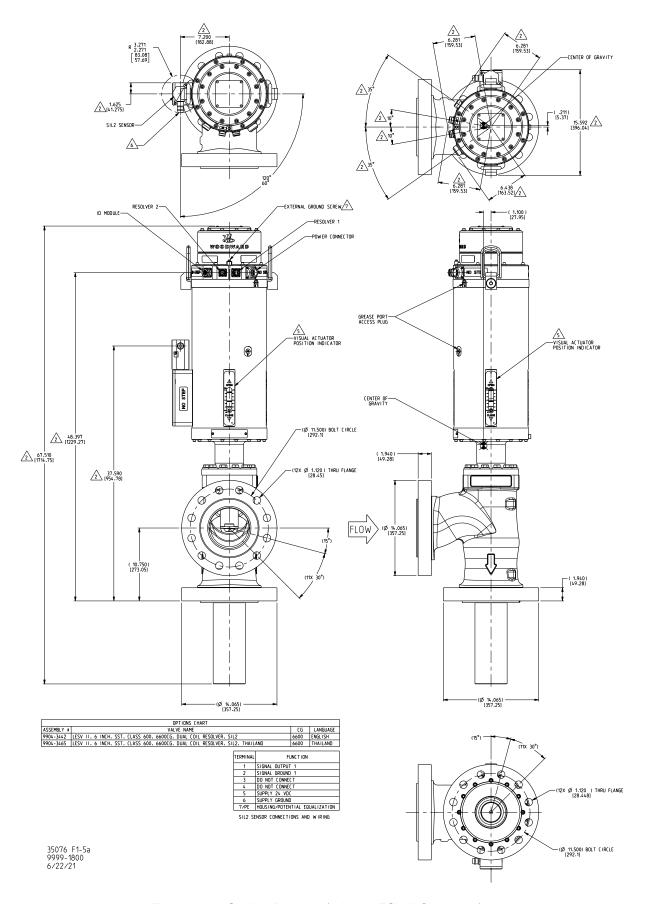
Outline Drawing (6-Inch LESV II Class 600)
